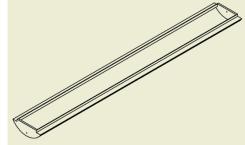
A Black Body with holes on the inlet and outlet holes on sides
